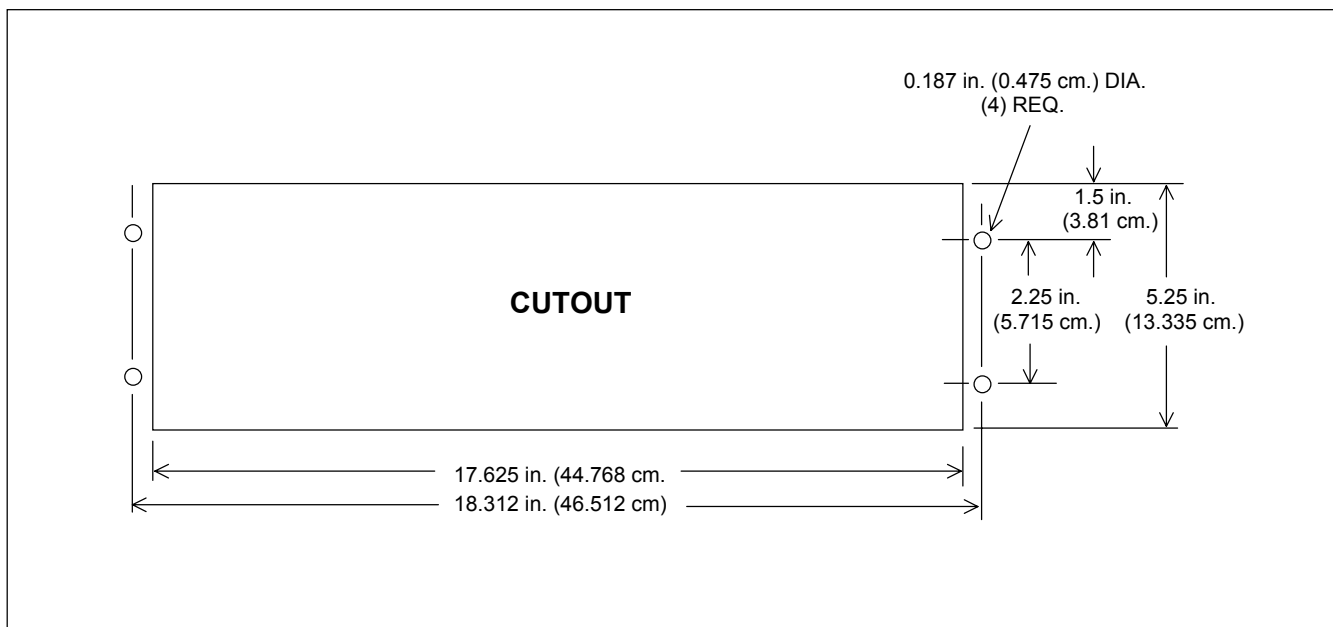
Mounting dimensions, RFL 9785 Programmable ON/OFF Powerline Carrier System
